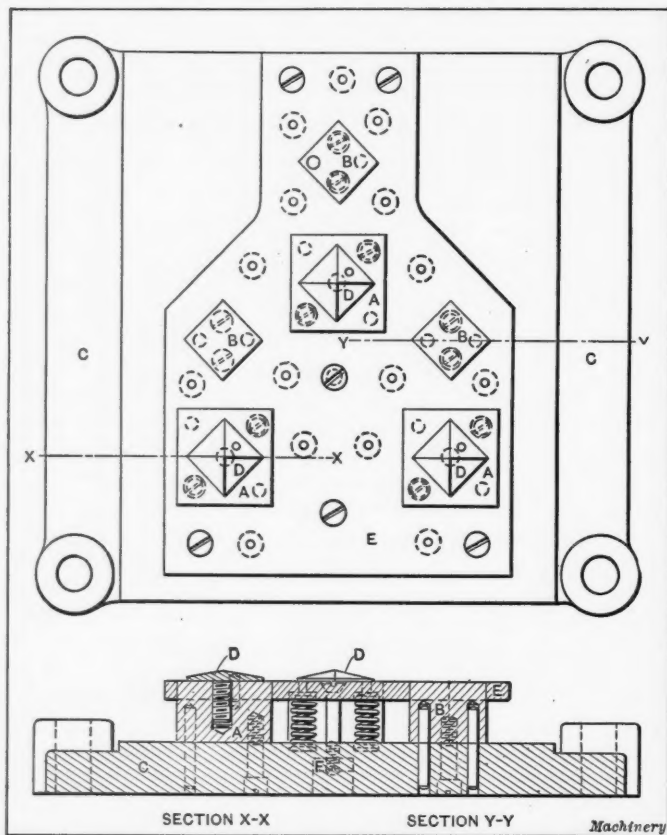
Plan and Sectional Views of Blanking and Piercing Punches
